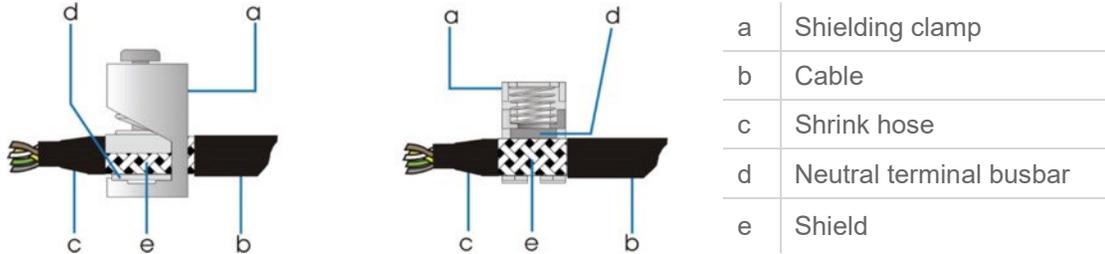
Left: Shield over cable, hand-fasten shield securing clip, Right: Shield over cable, spring-type terminal
